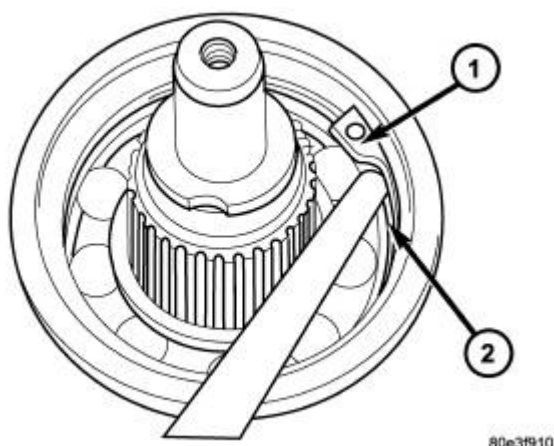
Remove/Install Rear Output Shaft Retaining Ring
